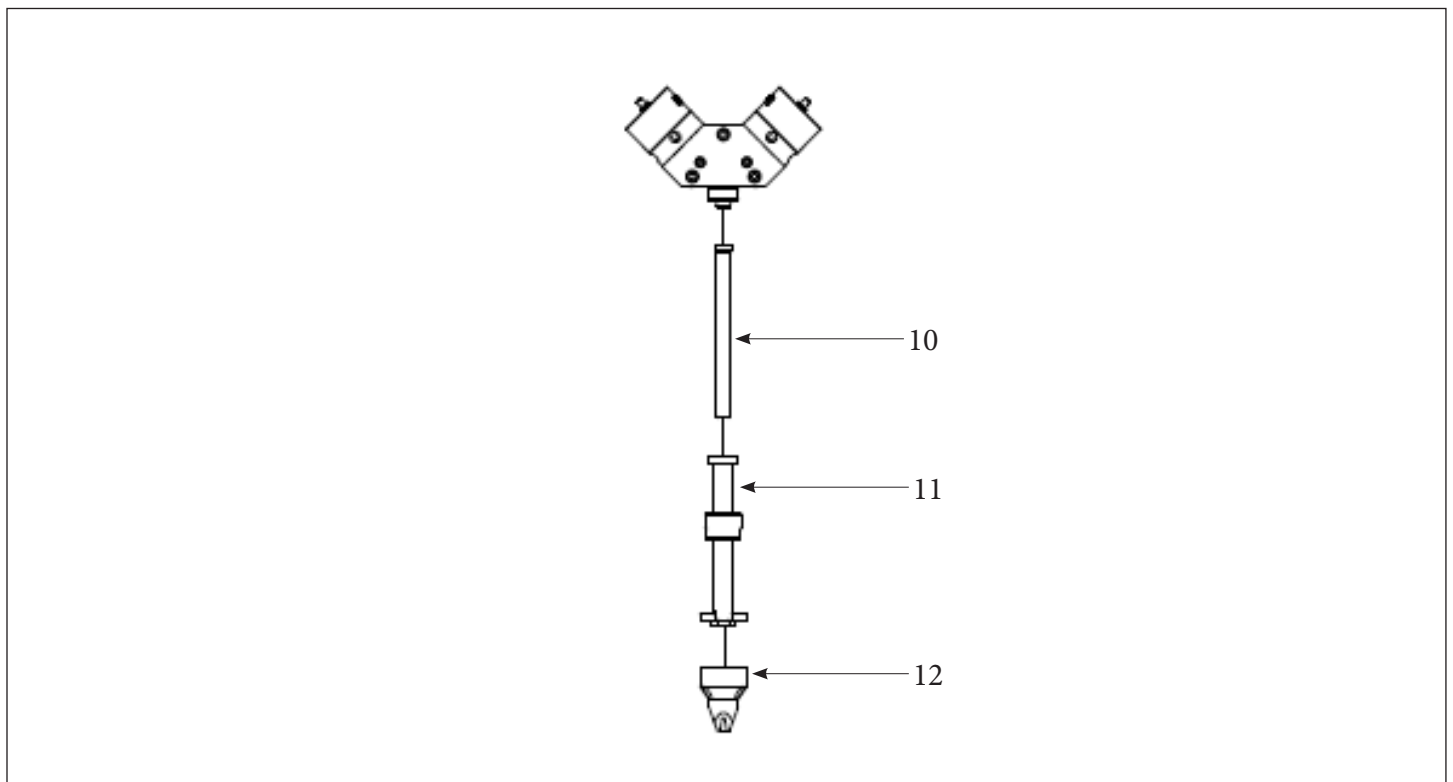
179 Series Valve Assembly - Less Heated Manifold With Mixer, Mixer Shroud, And Mixer Nozzle
